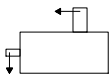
Gear-unit features on gear units type B2PV ≥ 13
